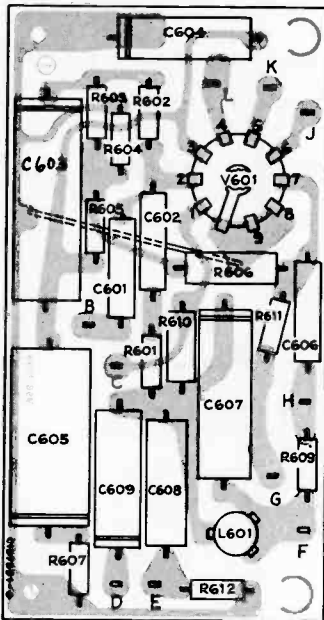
PW 600 Horizontal Oscillator Assembly Layout
